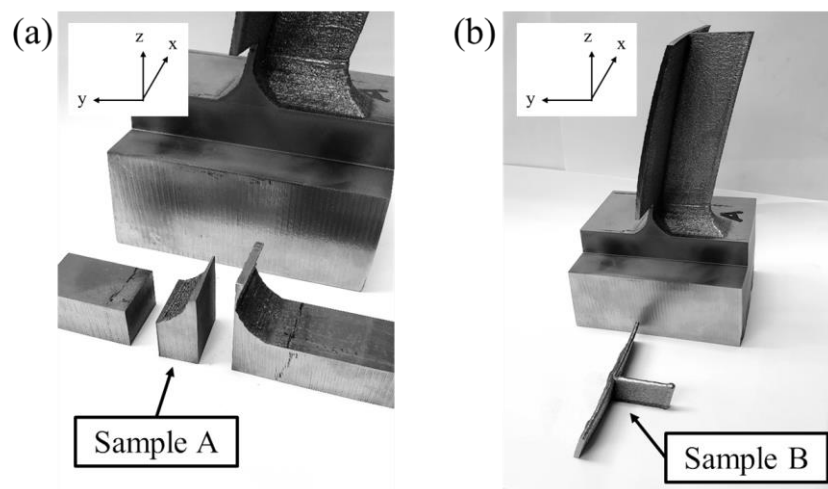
A block containing the build wall, attached stiffener, and baseplate was sectioned from original build geometry using a band saw. (a) Sample A was sectioned from the baseplate-build wall interface, while (b) Sample B was sectioned from the top of the build to include the build wall-stiffener interface. Both samples were sectioned using EDM.
